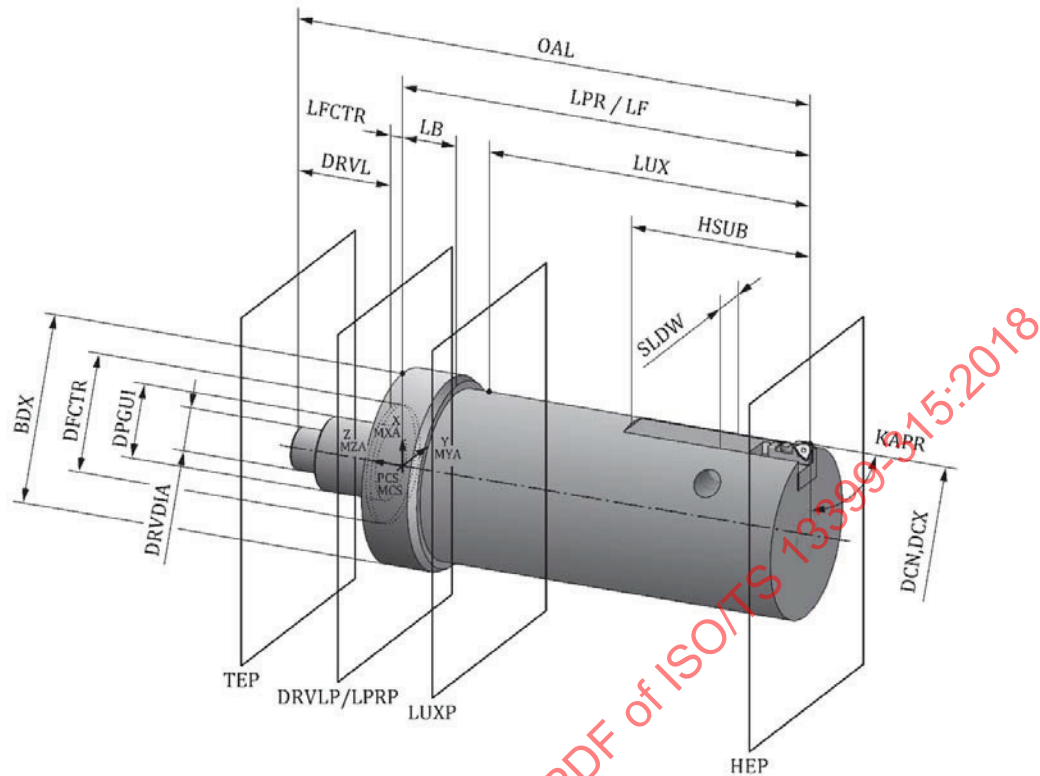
Assembled feed out tool with one peripheral swivelling slide
